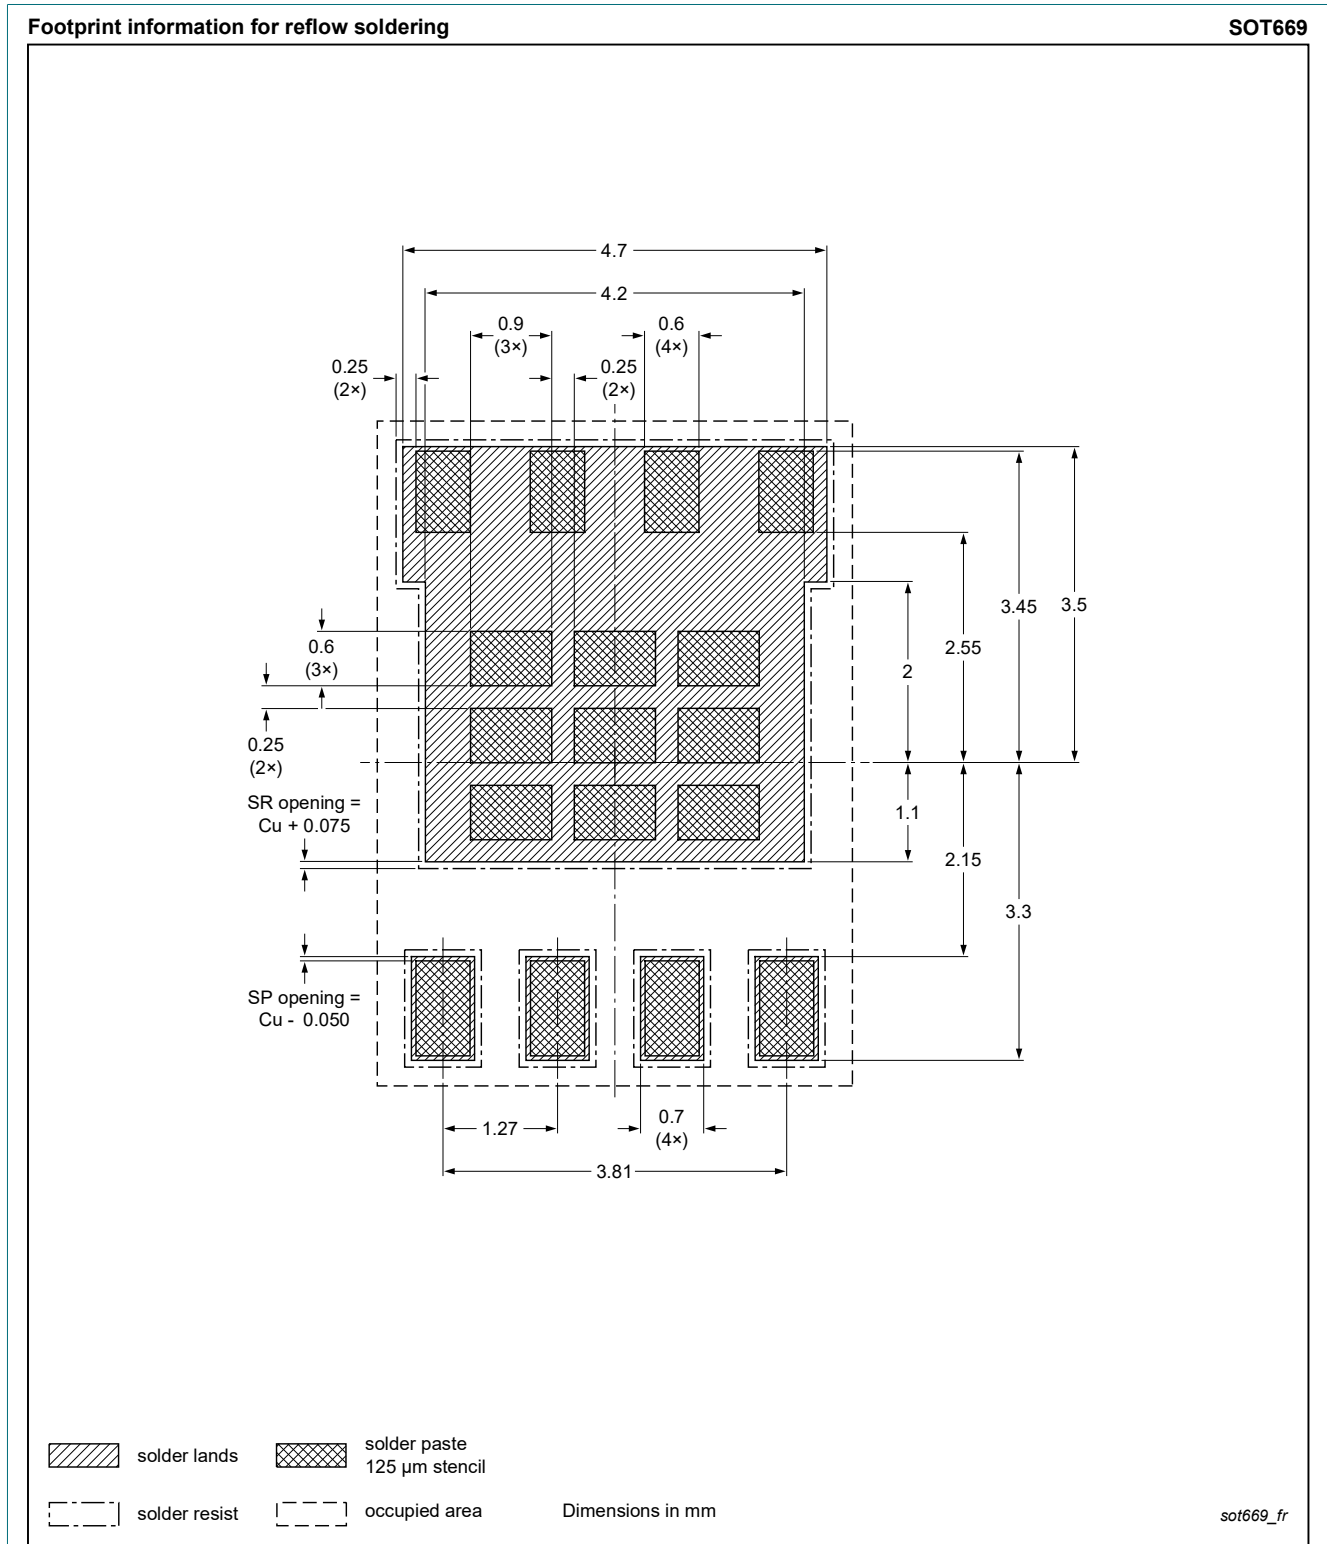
Reflow soldering footprint for LFPAK56; Power-SO8 (SOT669)
